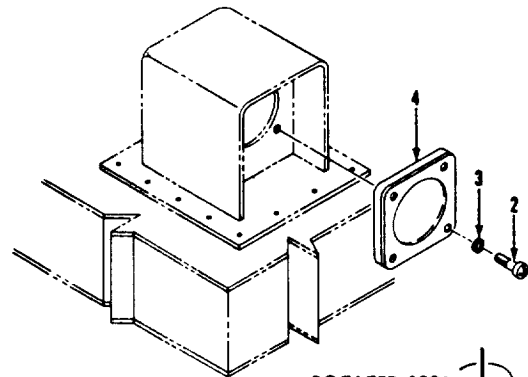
Environmental Chamber Structural and Mechanical Assembly (Sheet 3 of 4)
